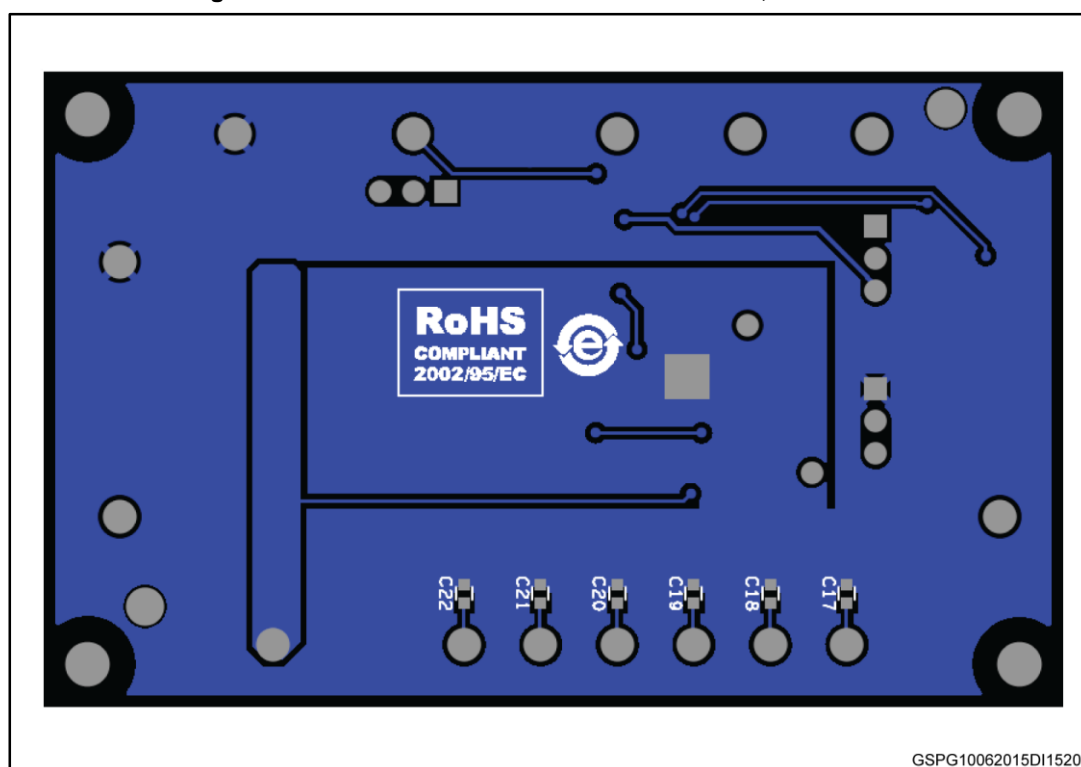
STEVAL-ILL067V1 evaluation board PCB, bottom view
